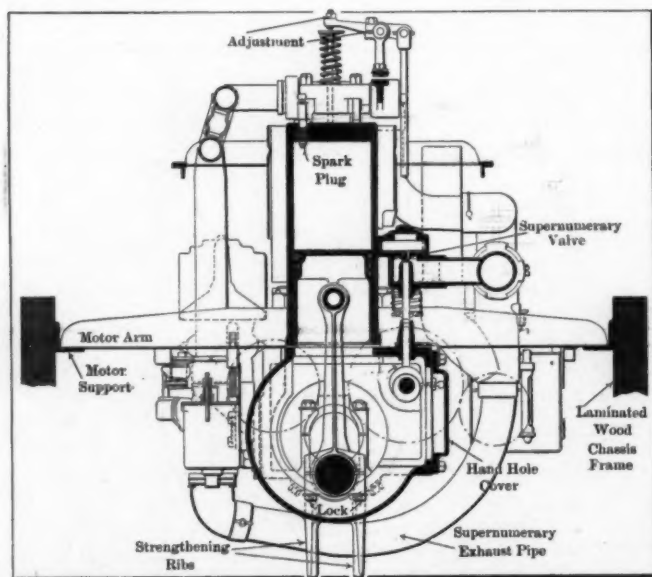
Cross section through a cylinder showing the location of the auxiliary valve and the plan of suspension
